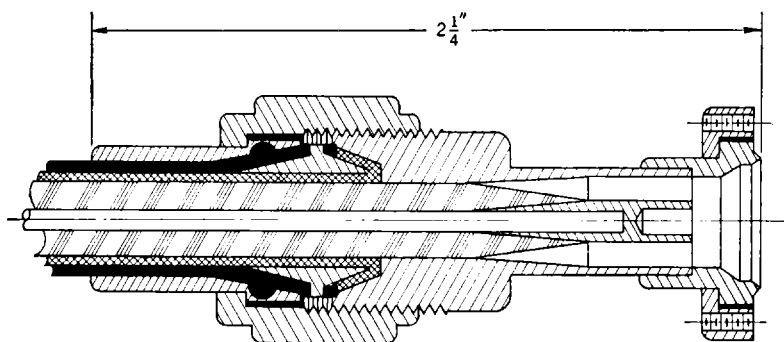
AN-type adapter from RG-14/U cable to $\frac{3}{8}$ -in. rigid line.
